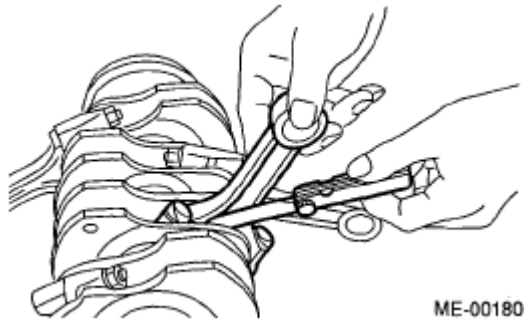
Measuring Connecting Rod Thrust Clearance Using Thickness Gauge
